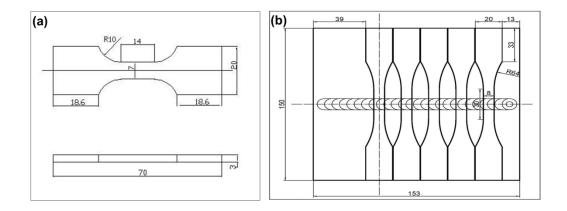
Design of the fatigue specimens machined from the welded sheets of Al-Mg-Sc alloy (a) and 6061 alloy (b). In all cases, units are mm. Not in scale.
